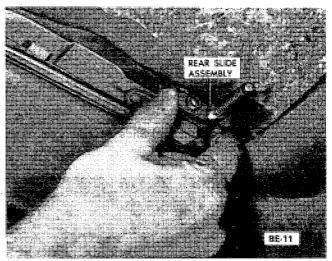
E-11 Removing Rear Slide Cable Assemble From Retainer
